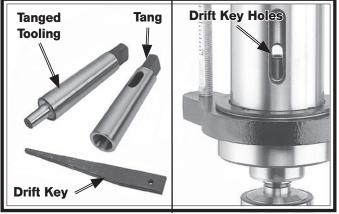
Example of tanged MT#3 tooling, drift key, and drift key holes in quill/spindle.
